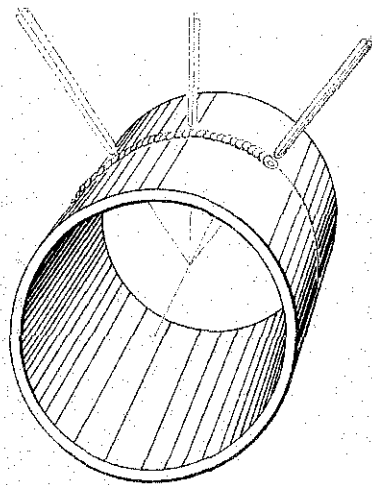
Welding position of pipe using Shielded metal-arc welding
